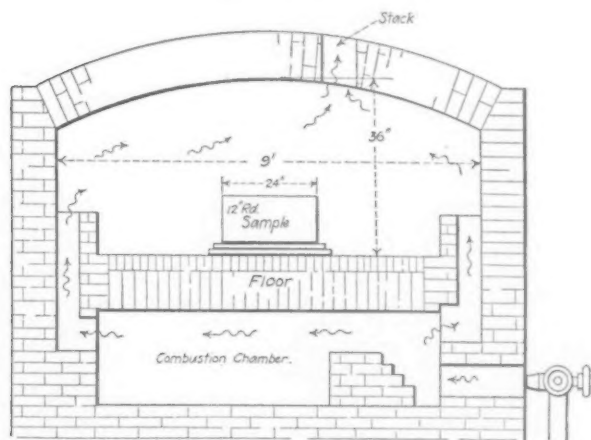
Section of Heat-Treating Furnace Showing Location of the Specimen
